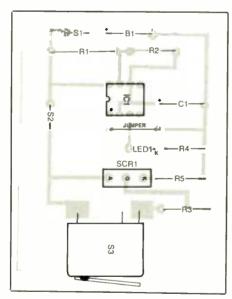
Wiring guide for pc board. Use this as a rough guide to component layout if project is assembled on perforated board.
